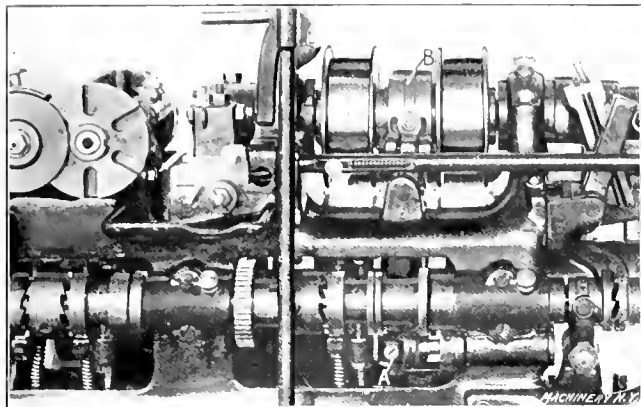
(Rear View) Number 00 Brown & Sharpe Automatic Screw Machine showing Reversing Mechanism
